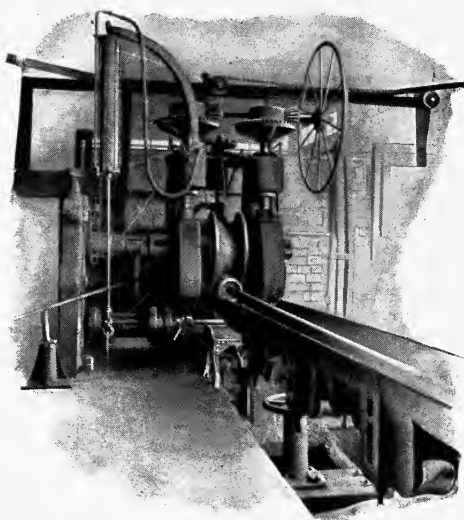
Machine for Lap-Welding Pipe.
